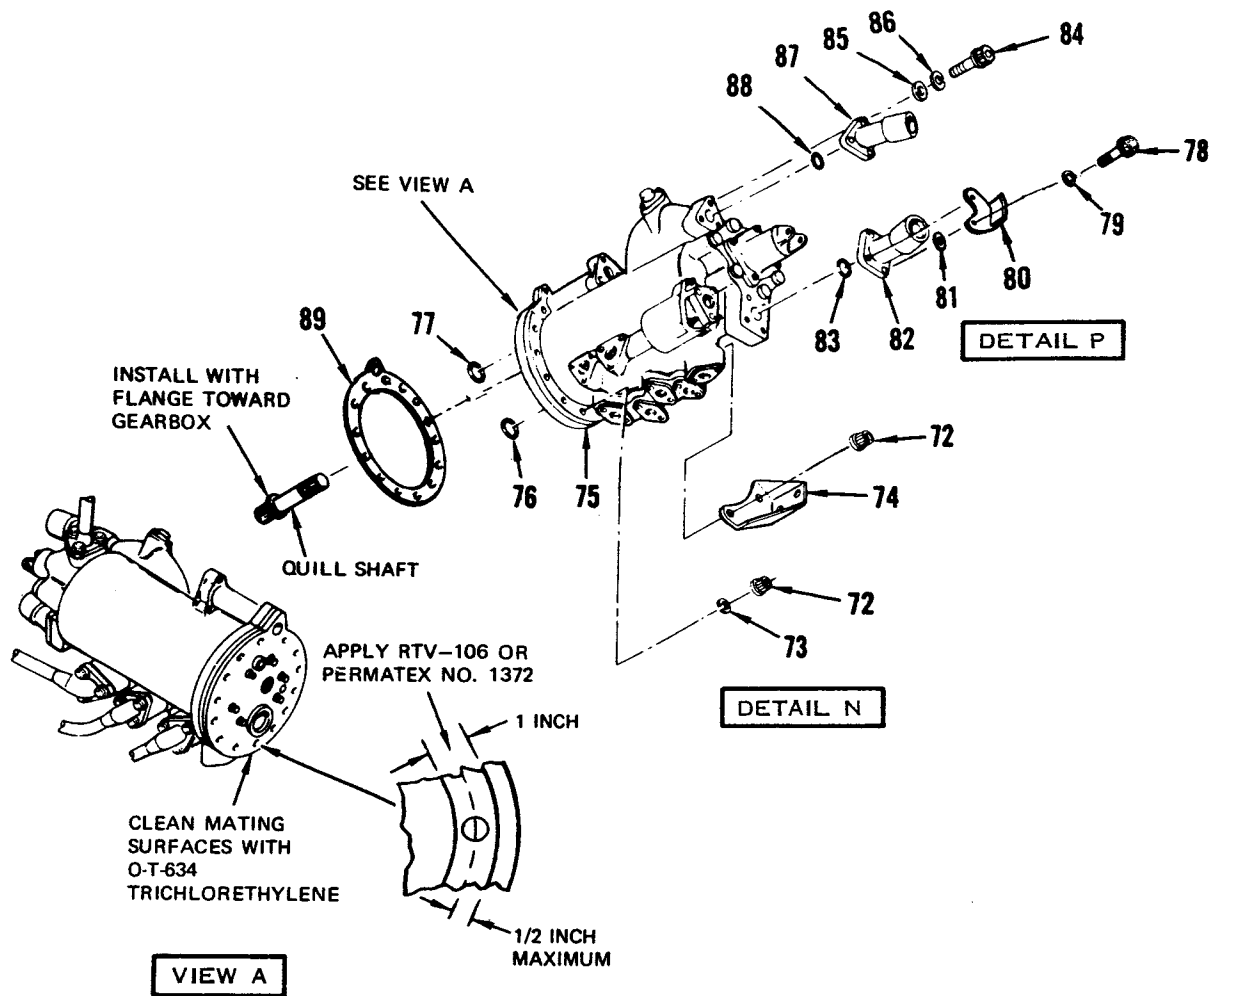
Removal and Installation; Oil Pump (Sheet 3)
